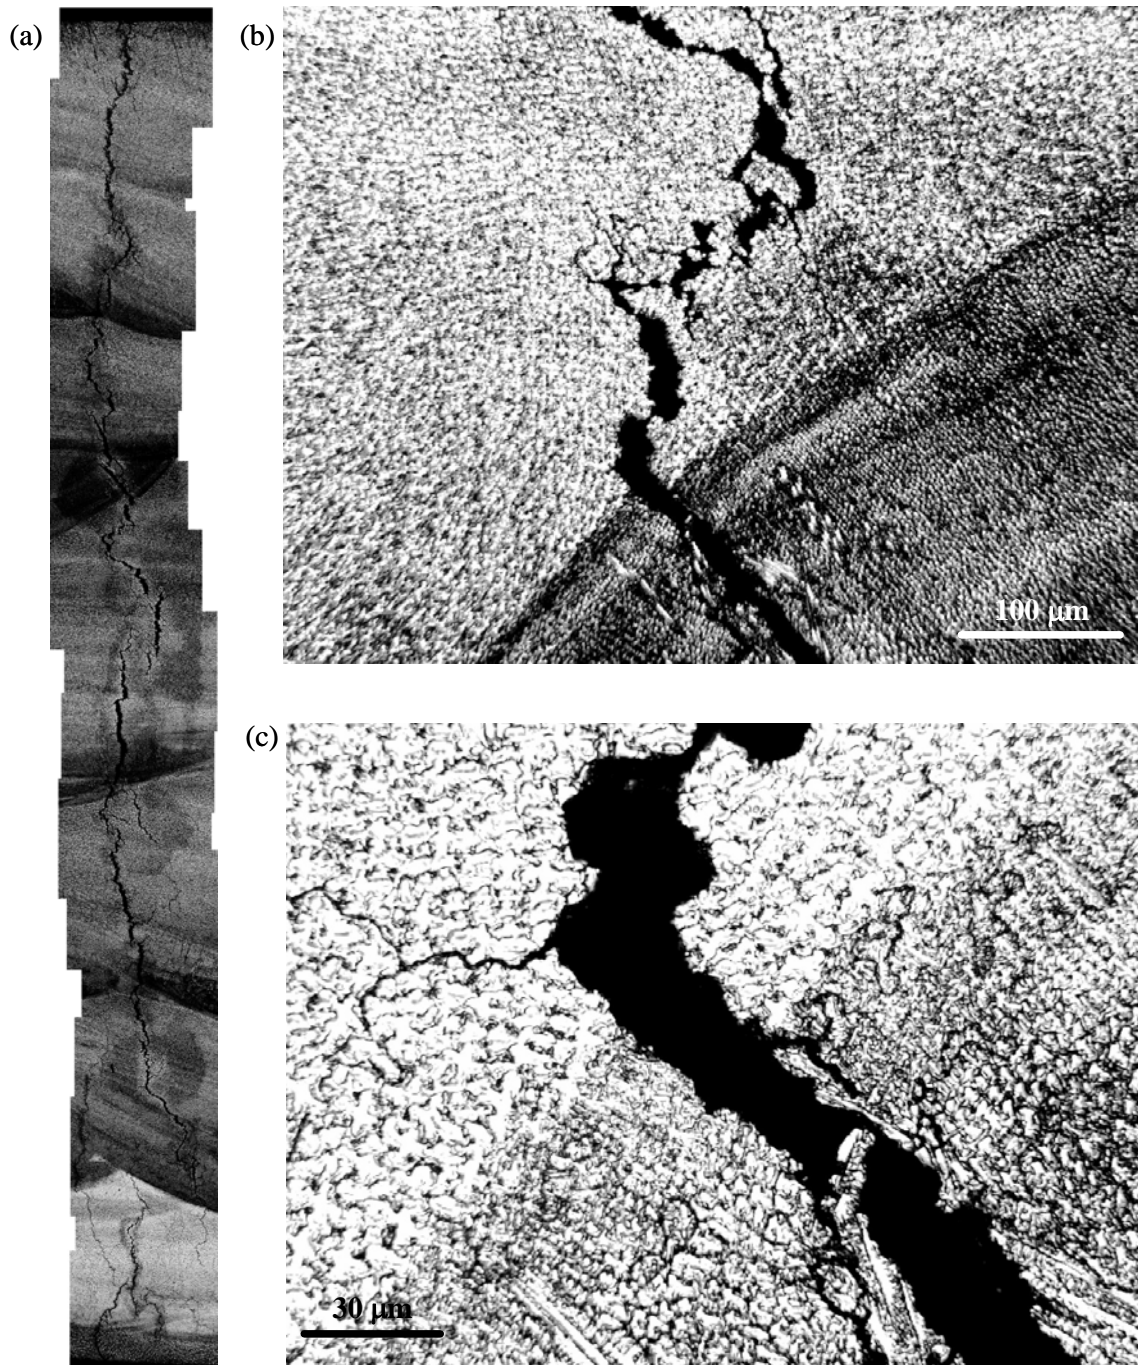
Stress Corrosion Crack in Alloy 182 Butter Pass Ending at the Low-Alloy Steel Interface and Creating Small Corrosion Pits
